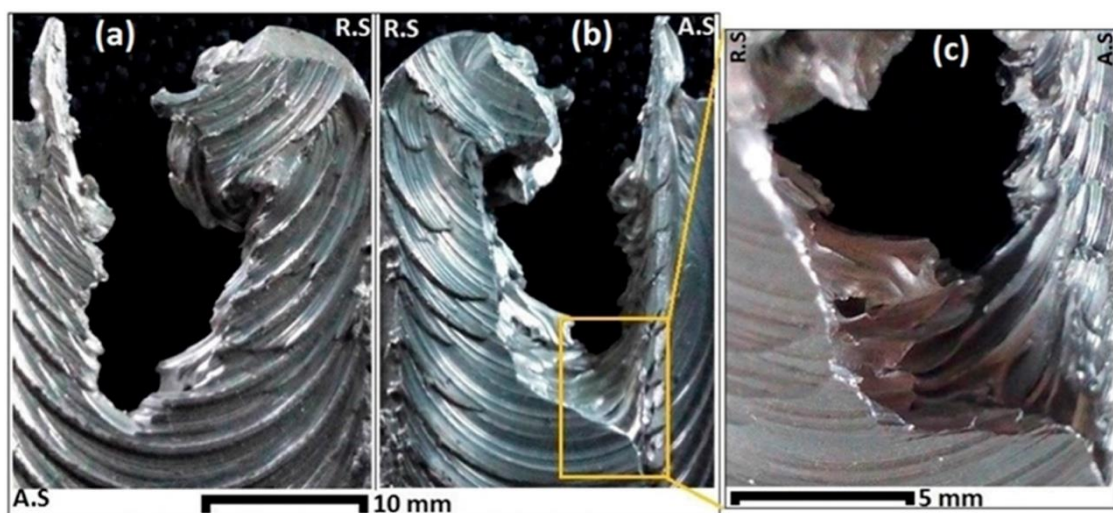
The exit zone for an aluminium weld: (a) Top view; (b) Bottom view; (c) End view.
